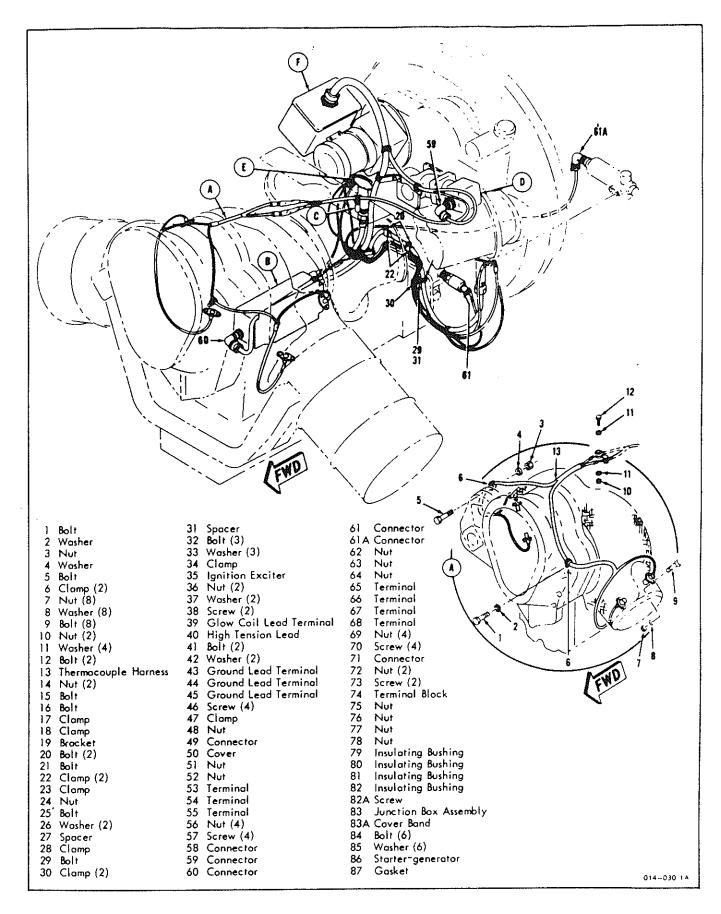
Electrical System Installation, Exploded View (Sheet 1 of 2)
